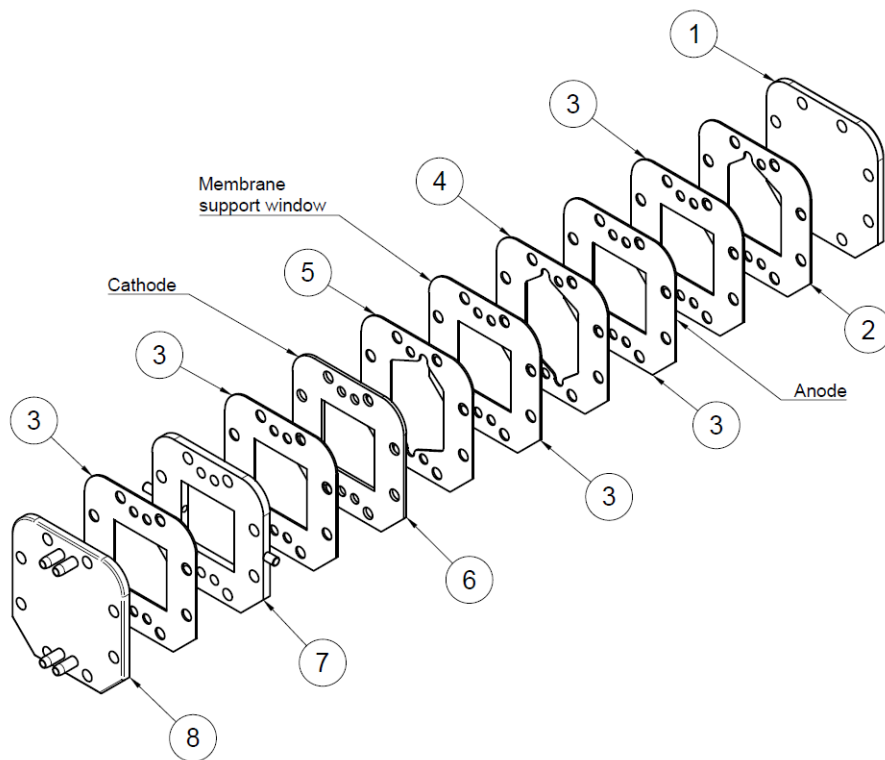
Exploded schematic drawing of the Proposed Cell Design.
